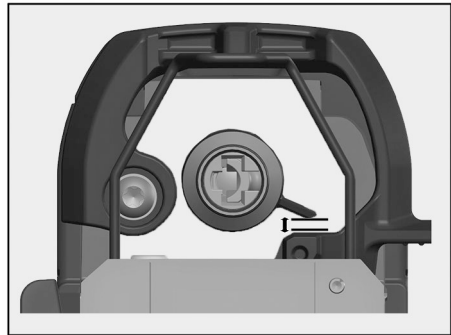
Distance between the lug on the lock bushing and the clamping lever
